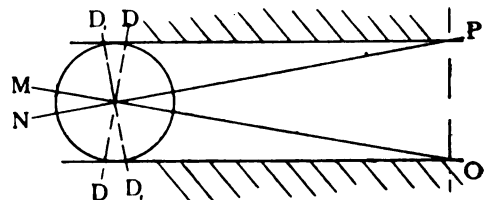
PARALLEL PLATE THRUST BEARING.
